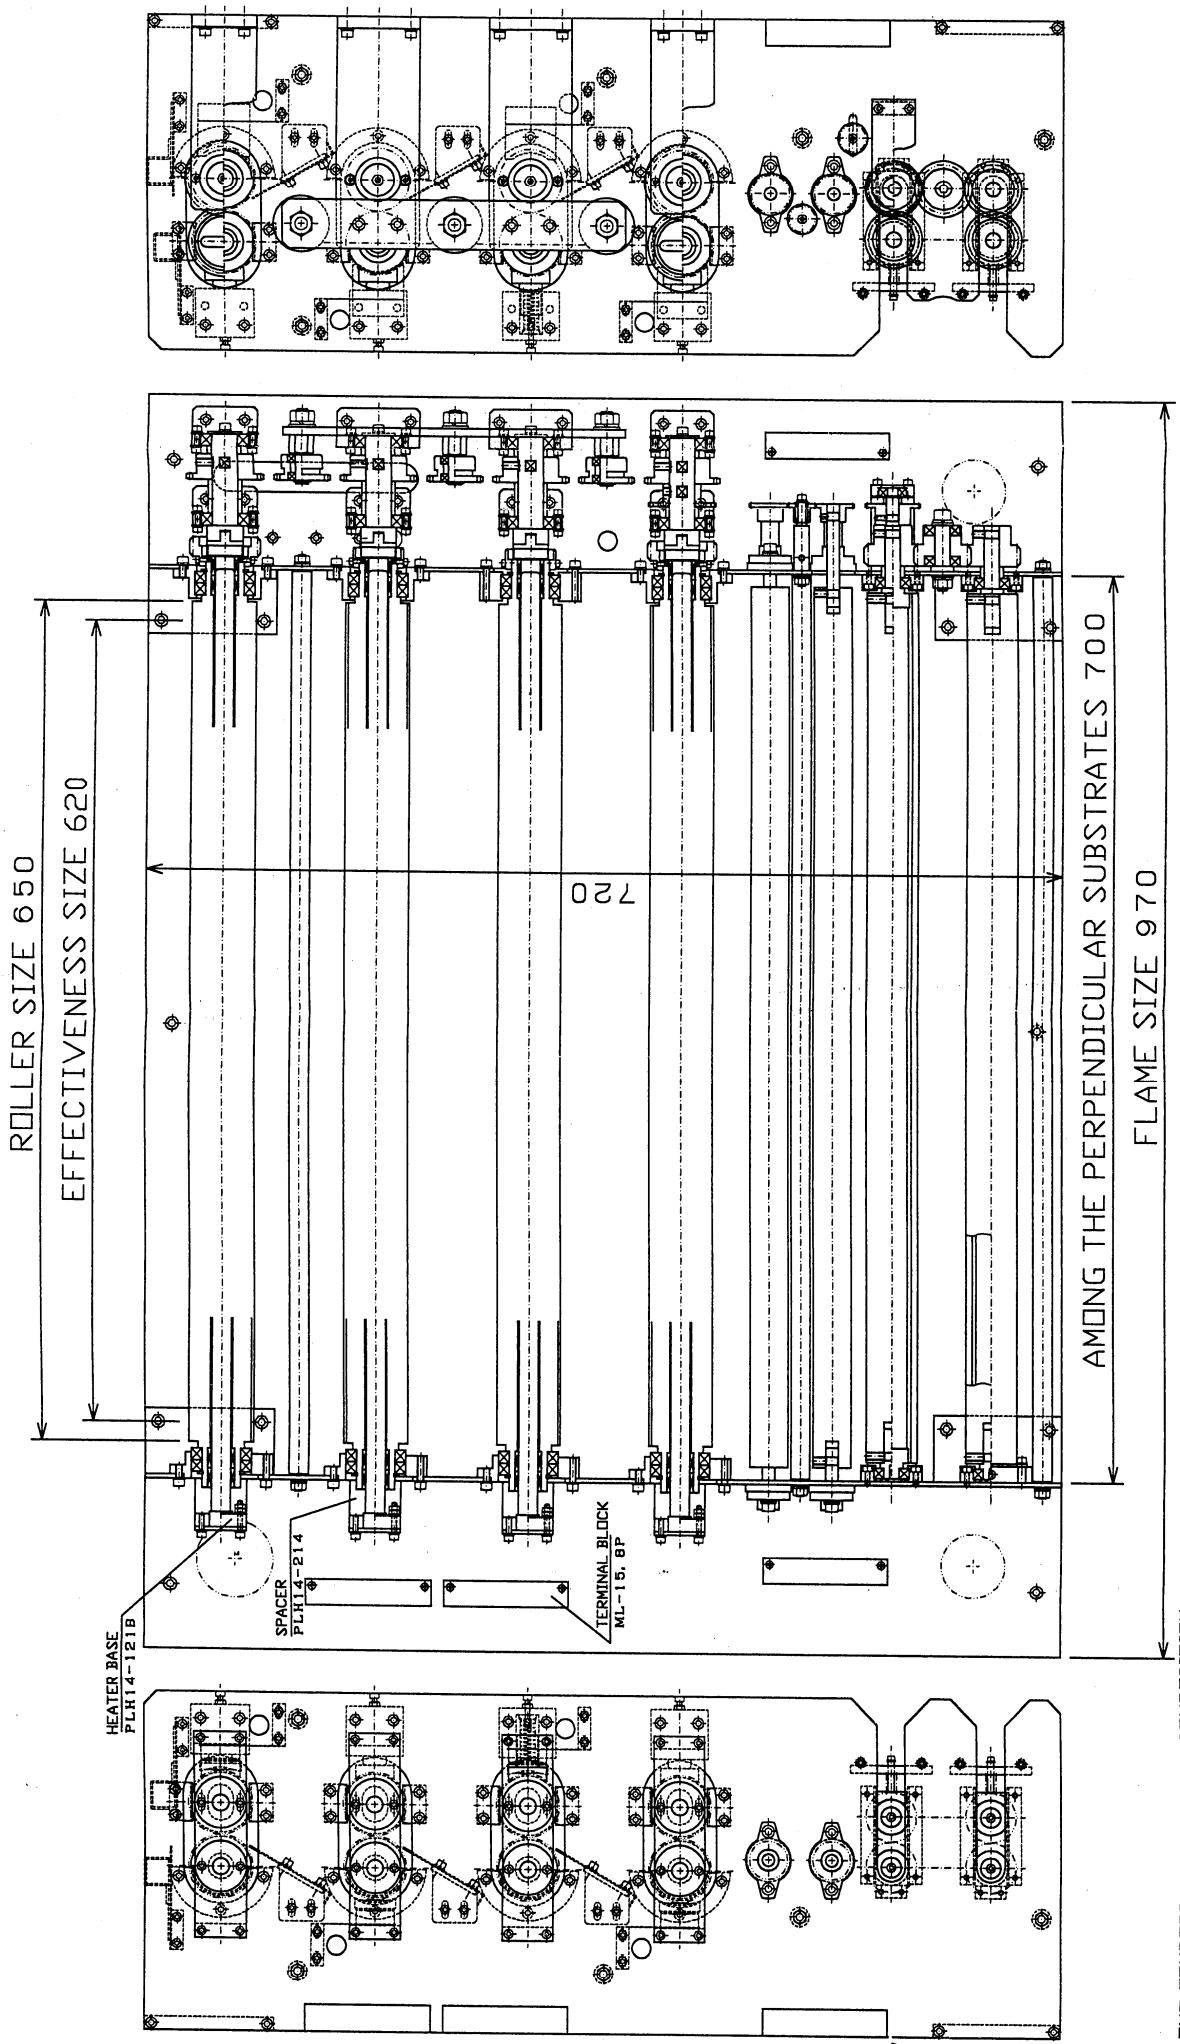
PREHEATING MACHINE MECHANISM FIGURE
